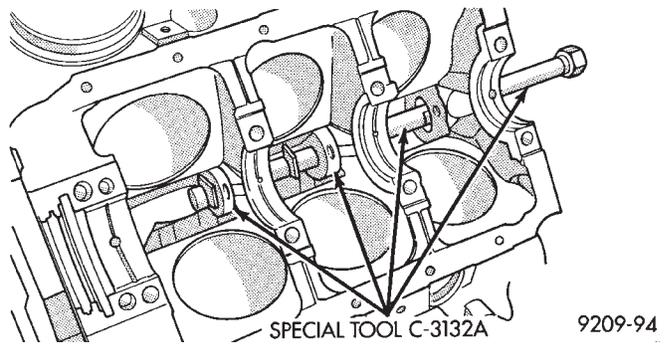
Removed Installation of Camshaft Bearings with Tool C-3132A—Typical
